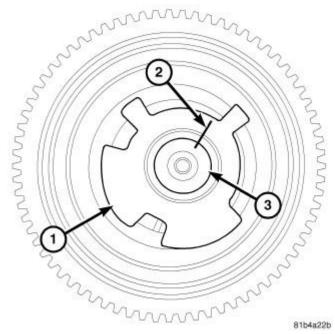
ATDC Camshaft Tool Courtesy of CHRYSLER LLC
